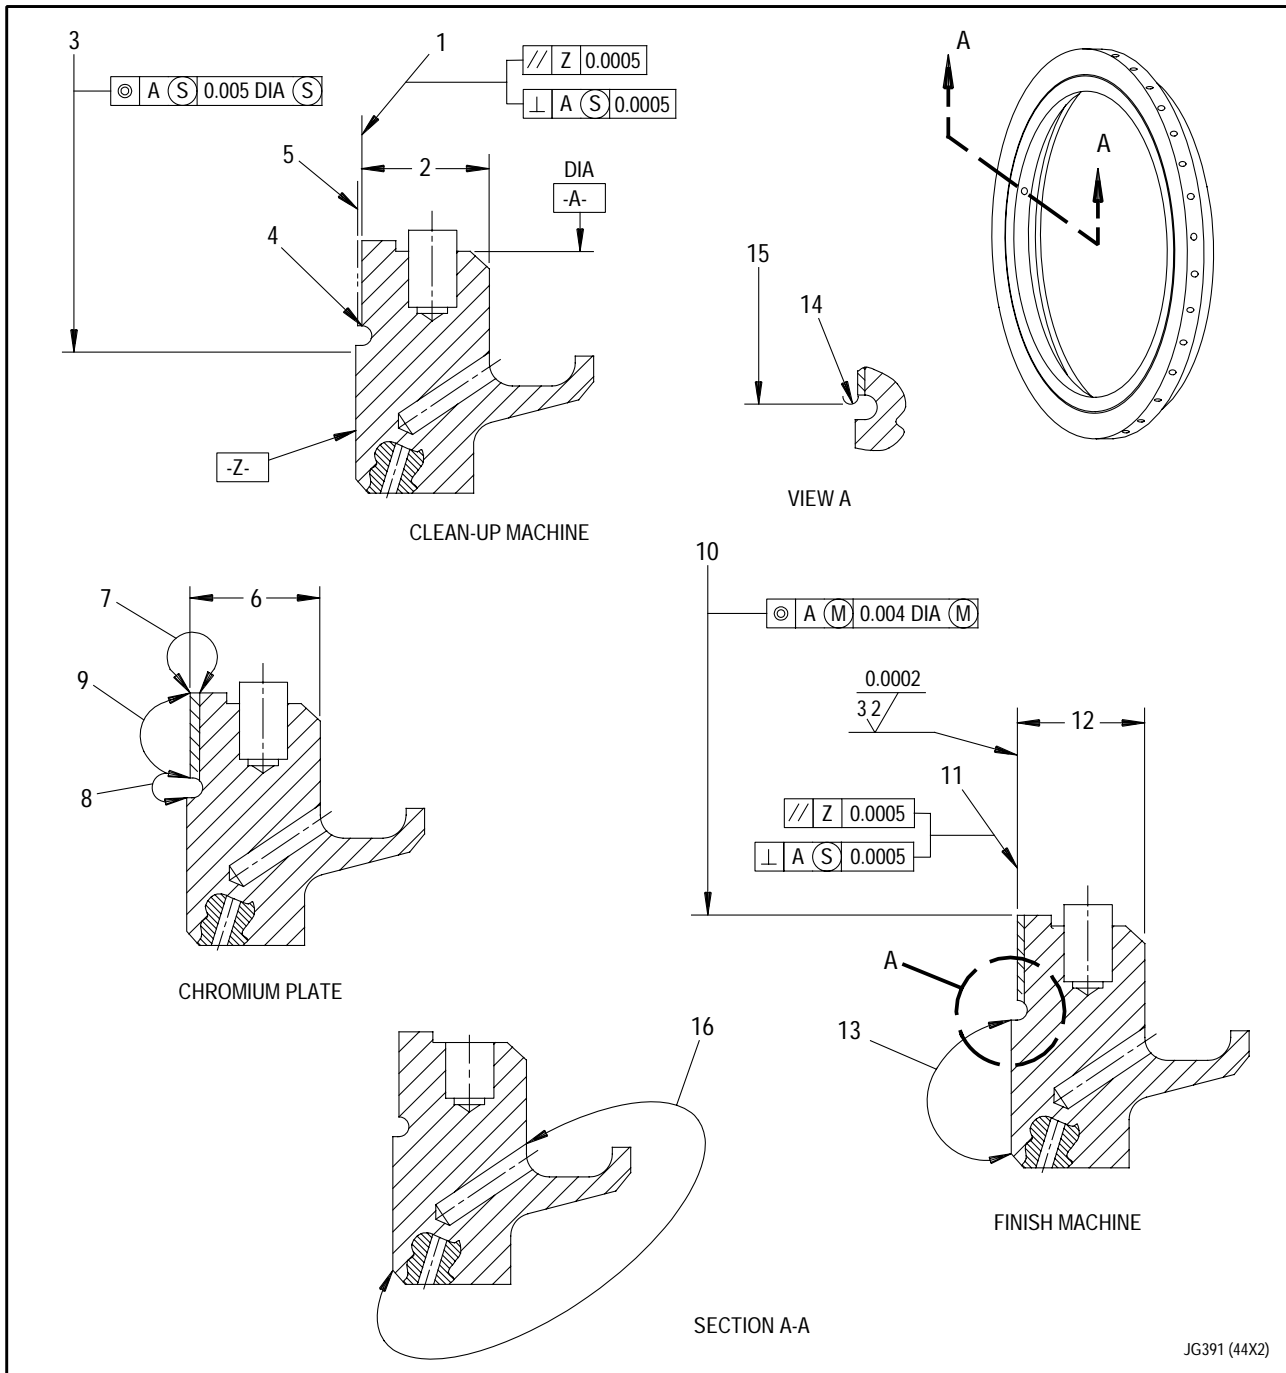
No. 3 Bearing Front Seal Seat Assembly - Chromium Plate Repair of Front Inner Face
